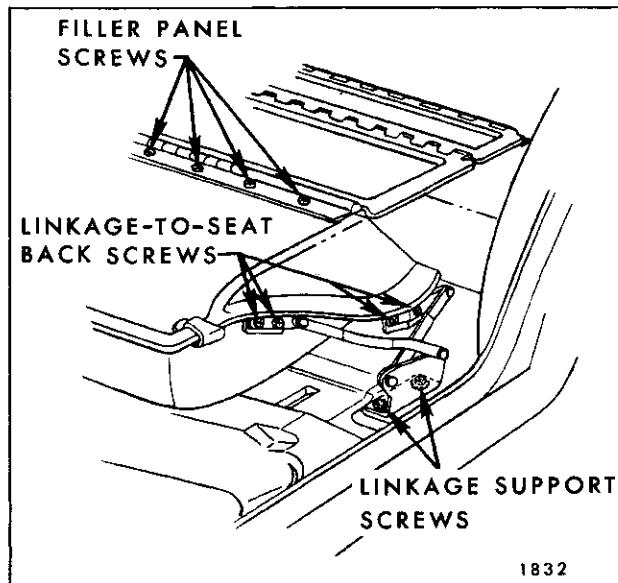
Folding Second Seat Back Linkage and Filler Panel
